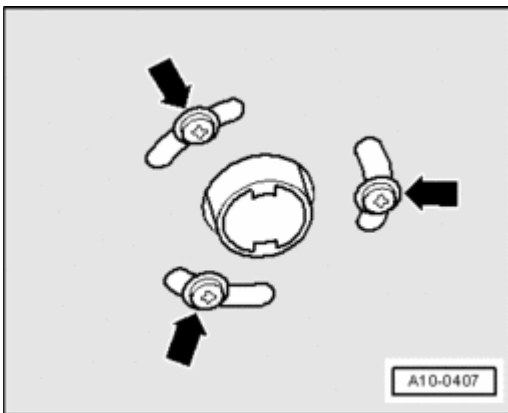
Removing Bolts For Exhaust Pipe Of Parking Heater/Auxiliary Heater On Noise Insulation
